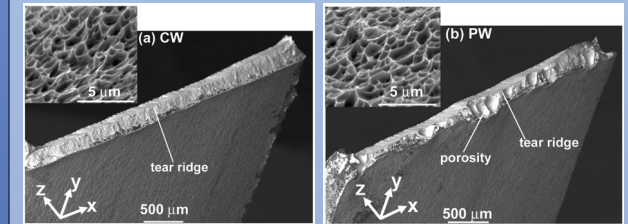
In the observed tensile fracture surfaces, it is apparent that the pulsed wave (PW) condition had substantial weld root porosity, whereas the continuous wave (CW) condition had little or no porosity.
